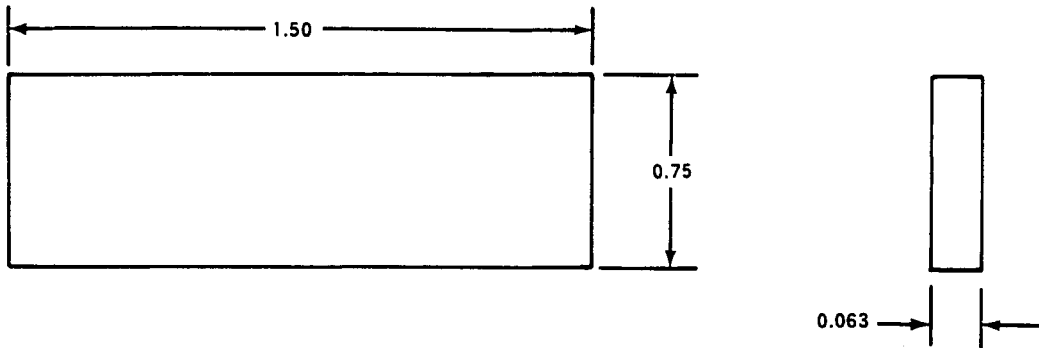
Part Number 205-031-862-17S, HINGE HALF
